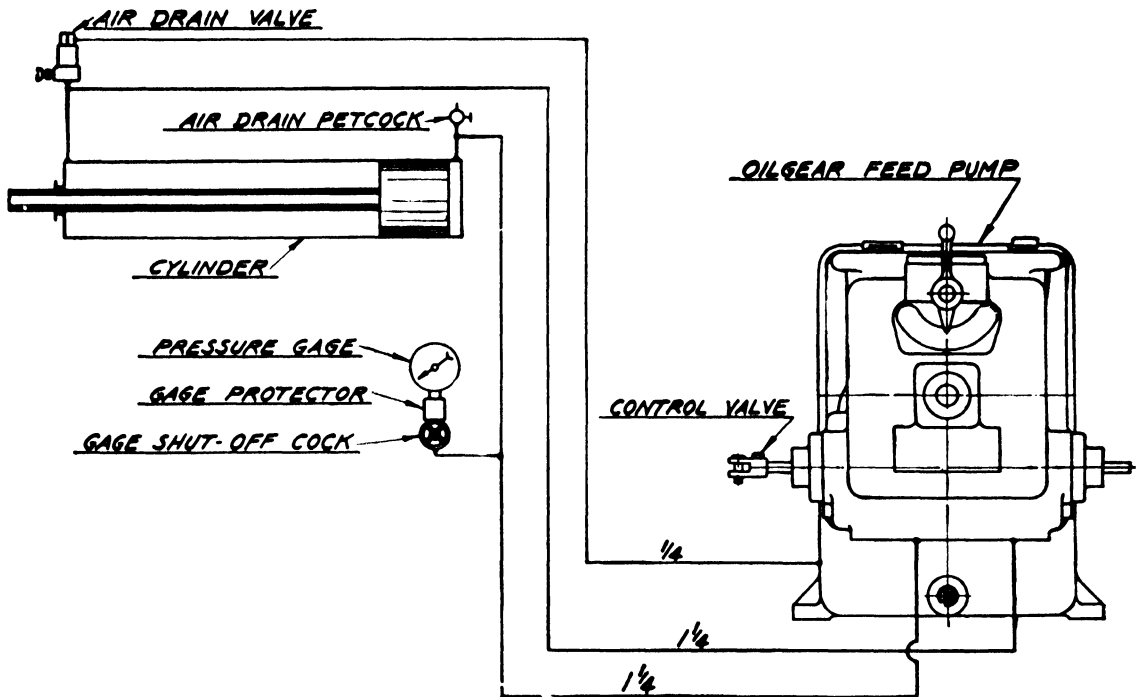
Oilgear fluid-power feed circuit. (The Oilgear Co., Milwaukee, Wis.)
